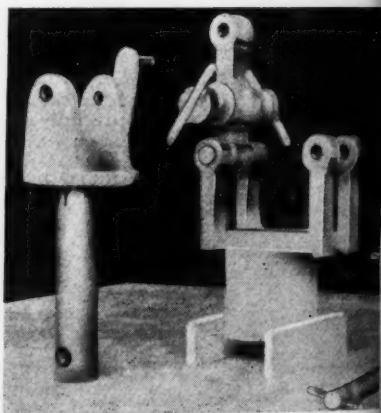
The Welding Fixture Shown in Fig. 5 with the Workpiece Removed and Standing at the Left of the Fixture.
